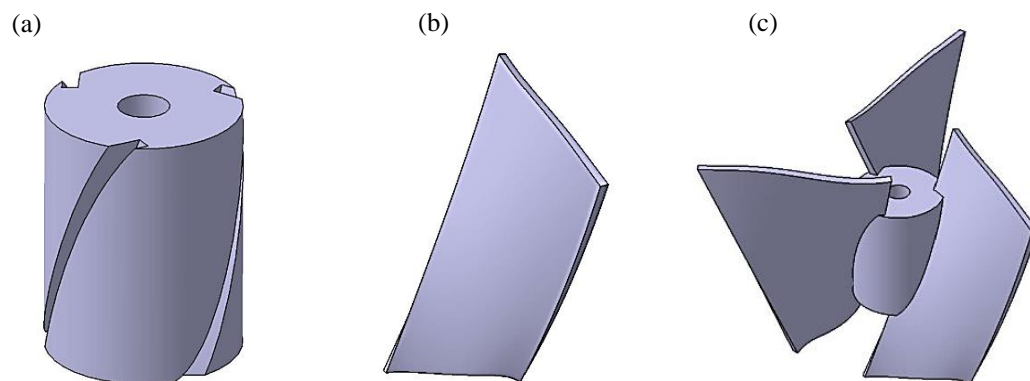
Final design for fabrication (a) hub (b) blade & (c) assembled hub and blades
